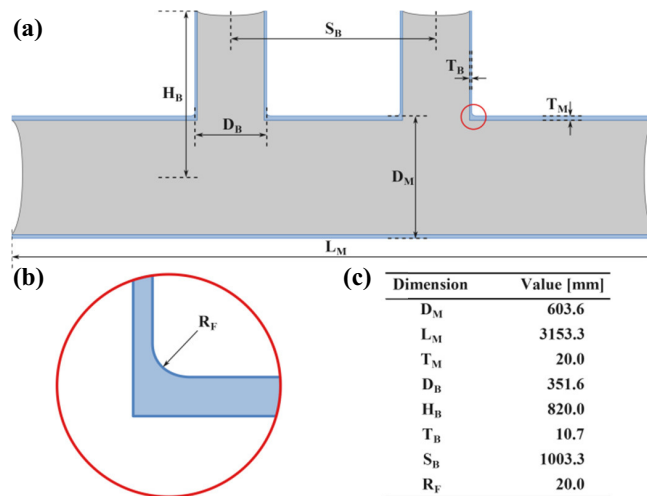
(a) Header Geometry; (b) Fillet Geometry; (c) Header Dimensions
